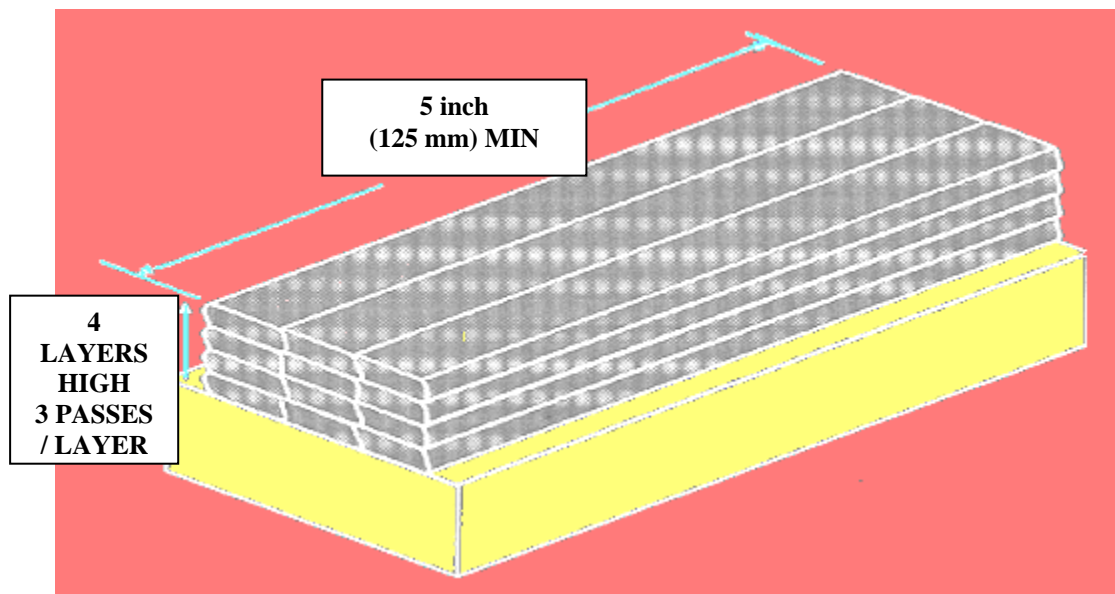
Weld pad for chemical analysis of weld metal [9]
